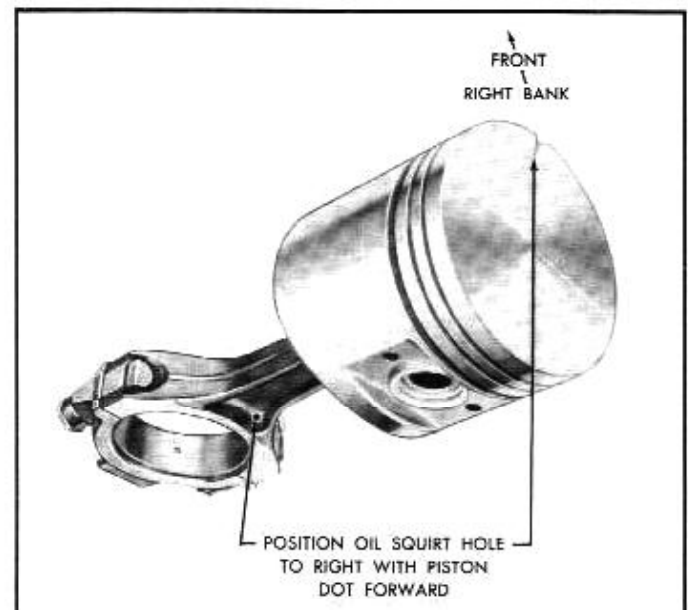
A-59—Position of Piston and Connecting Rod Squirt Hole—Right Bank
